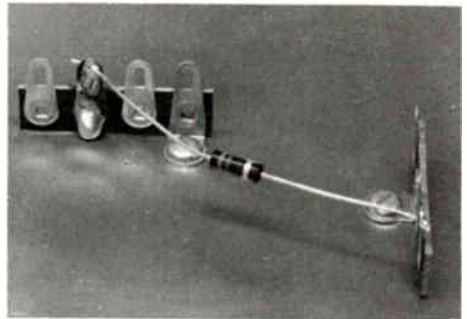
A terminal shorted to the chassis by excessive solder.
